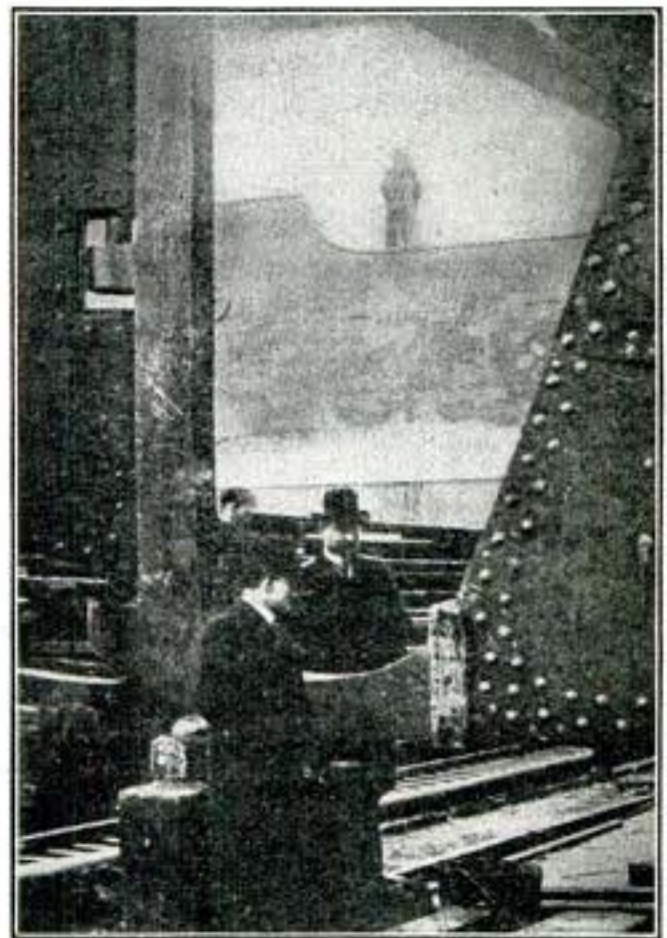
Welding Stern Post of the "Sevilla"
